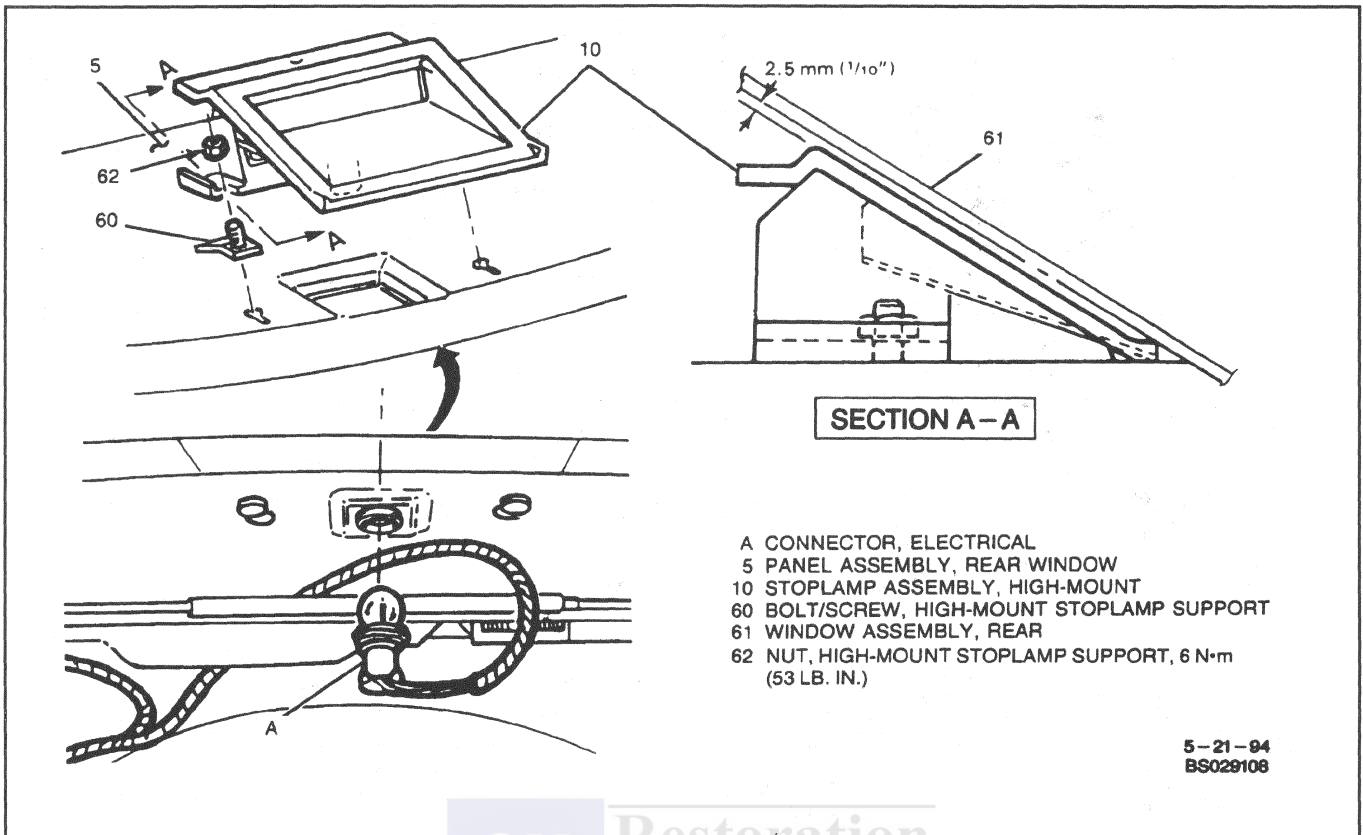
High-Mount Stoplamp-(Chevrolet)
